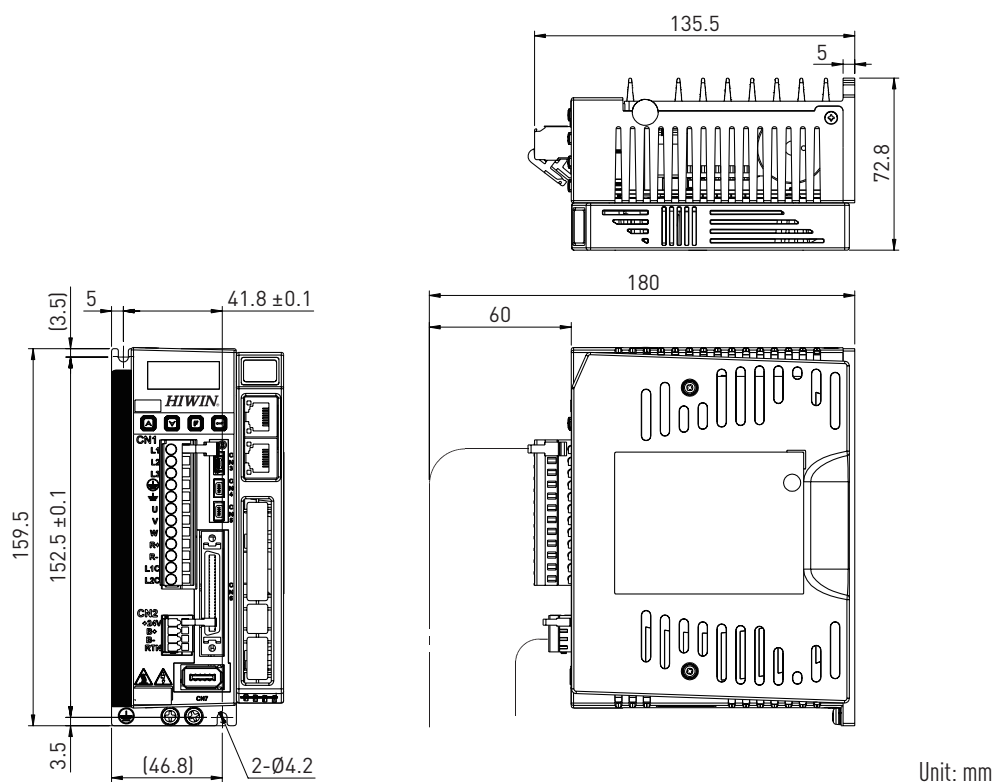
Dimensions D2(T)-04xx-F-xx and D2(T)-04xx-E-xx
